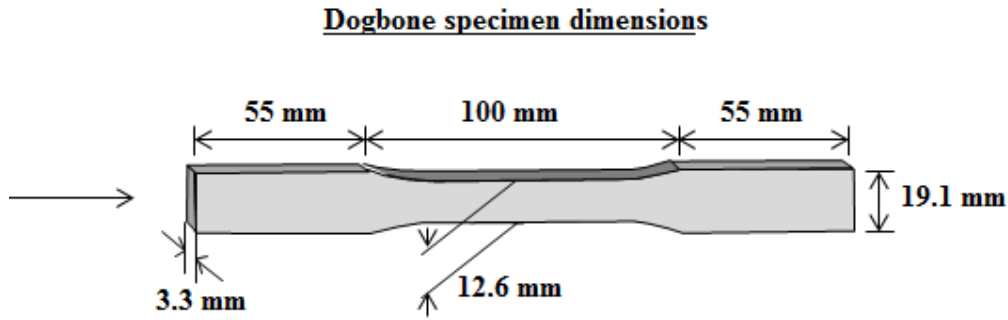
Dogbone specimen dimensions. Mold flow is indicated by the arrow.
